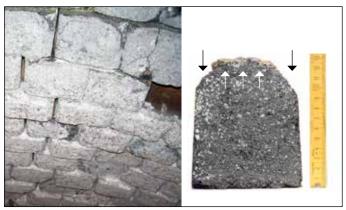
Steel casting ladle with typical wear at the joints, "cobblestone formation", and open joints.
